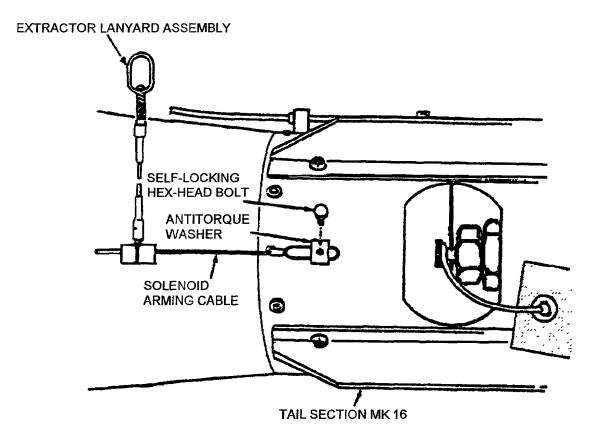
H. Solenoid Arming Cable to Tail Section Mk 16 Installation
